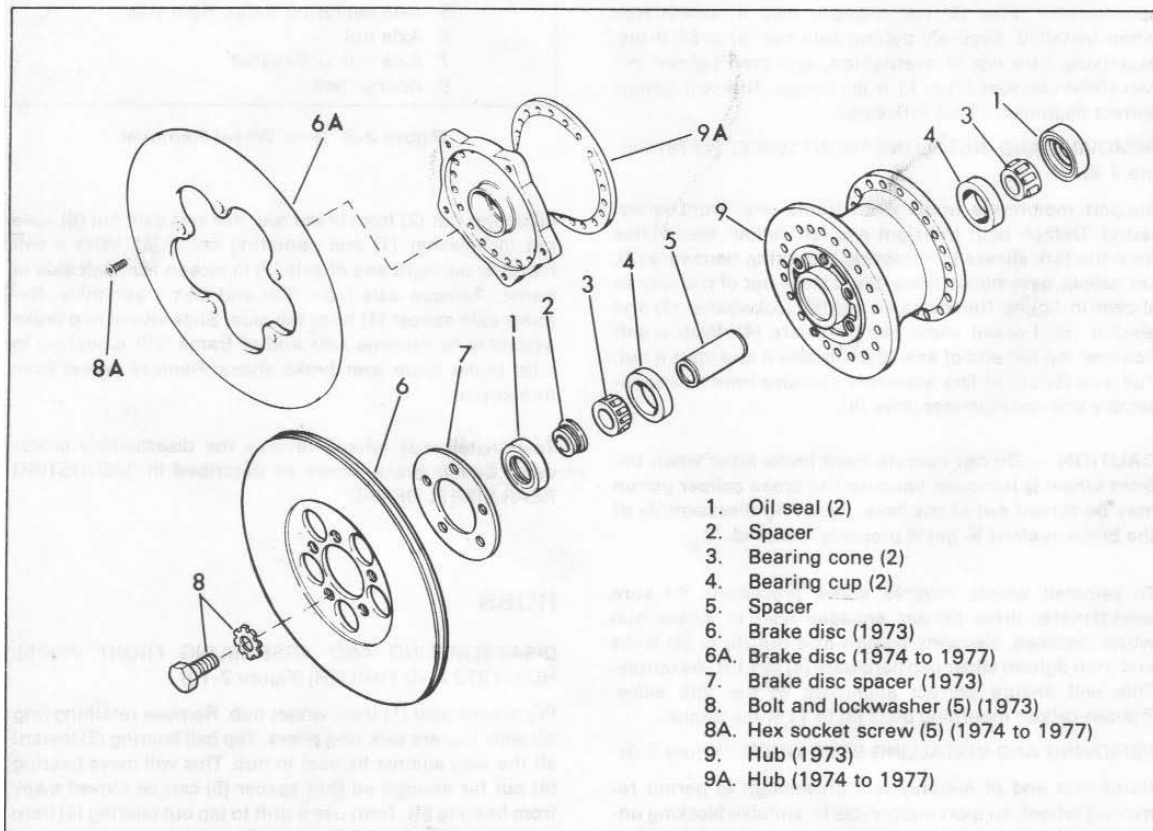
Front Wheel Hub - Exploded View (1973 to 1977)
